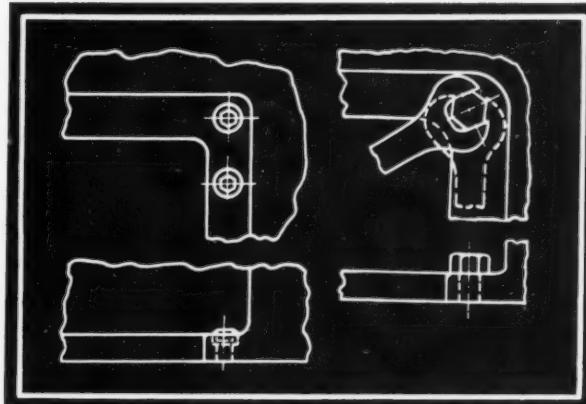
Because wrench works internally, clearance and overhang can be cut down by using hollow screws
